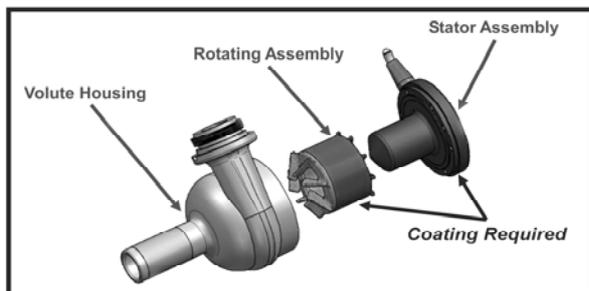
Depiction of an LVAD subassembly. RVADs differ only in RA impeller and in volute housing design.
